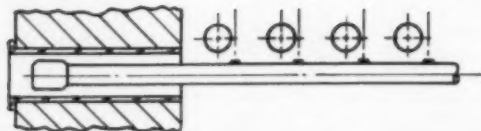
Incorrect. Due to axial shifting of soot blower element, jets are too close to tubes.
